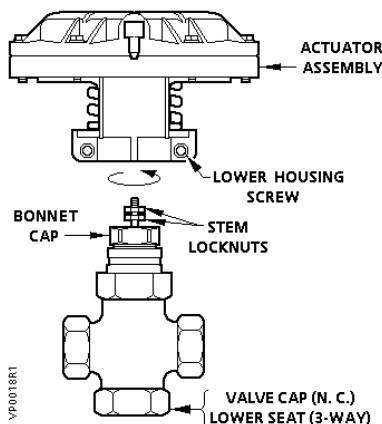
Actuator Assembly Removal on Normally Closed and Three-way Valves.
